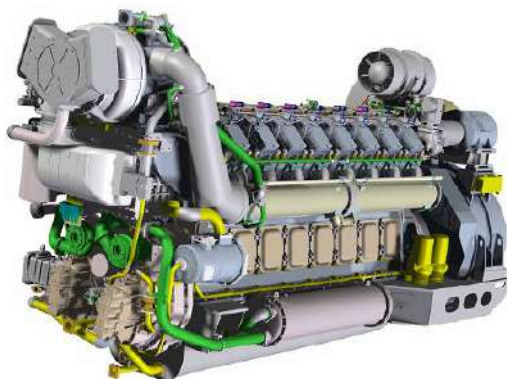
16XH26/26 diesel engine of diesel locomotive
